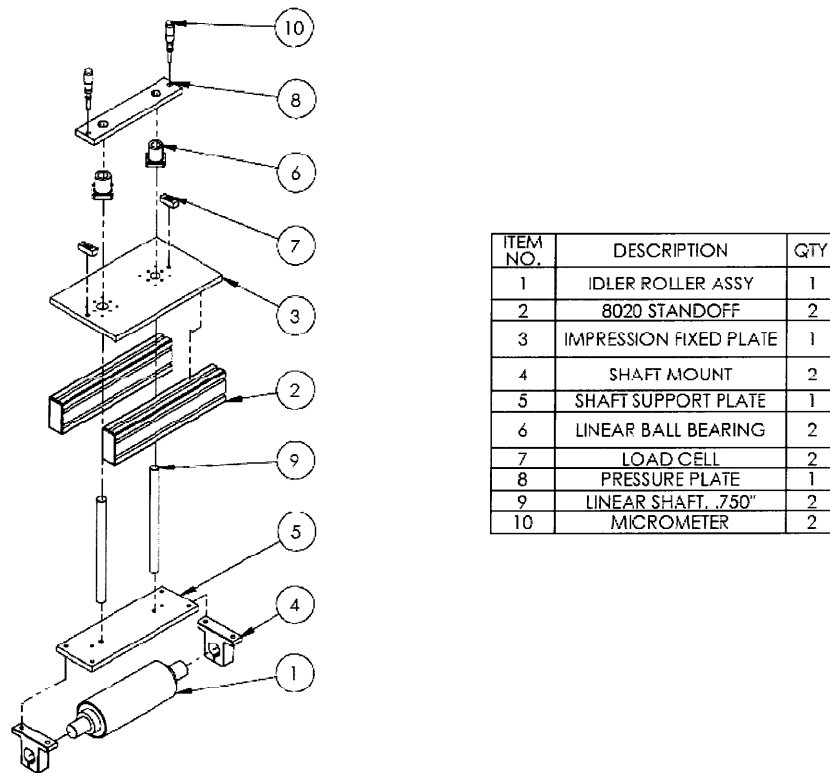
Exploded view of impression Assembly and Bill of Materials <sup>[4]</sup>.
